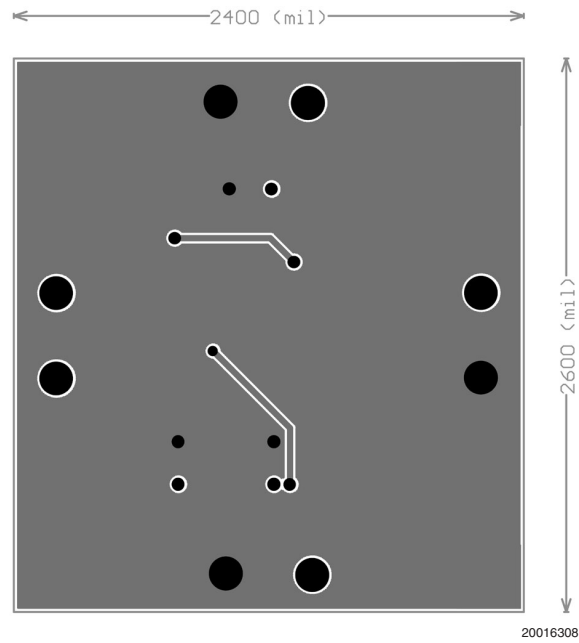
LM3477 Evaluation Board PCB Layout (Bottom Side)
